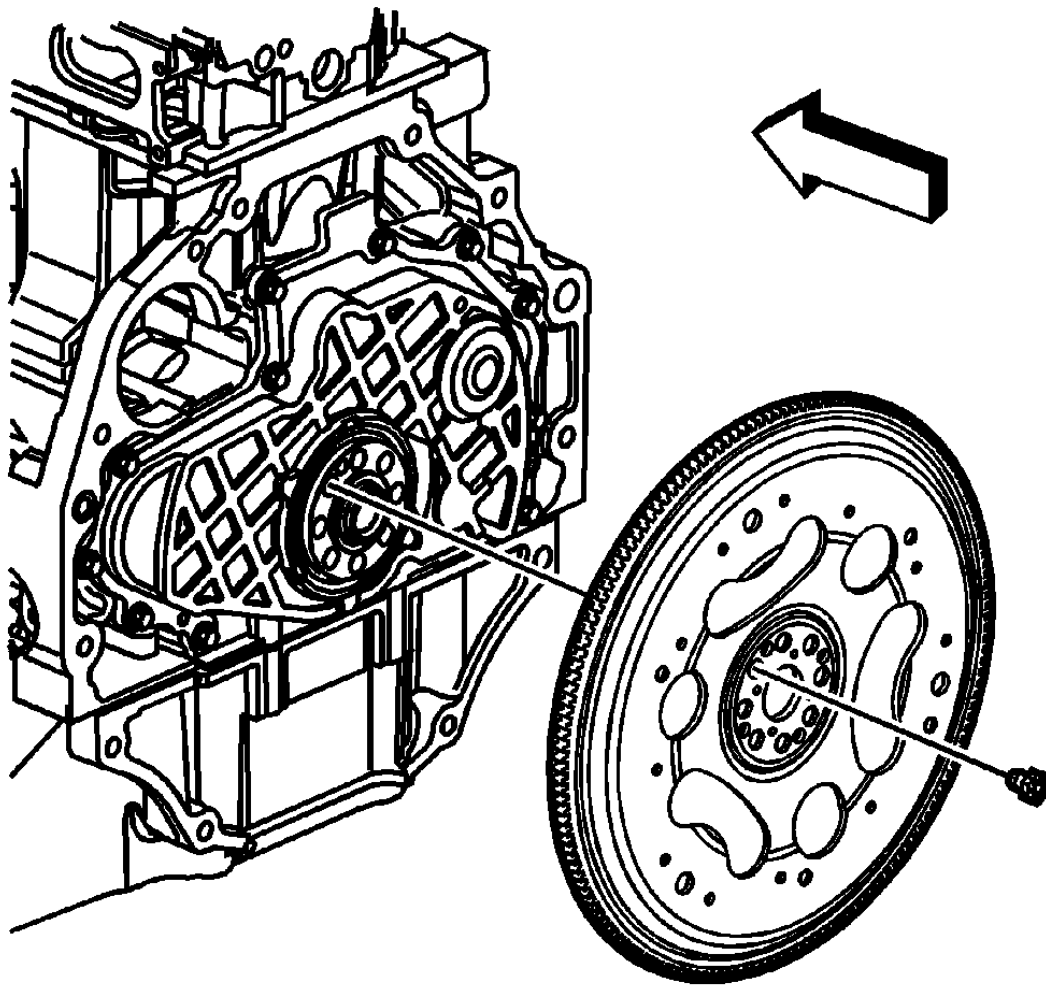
View Of Engine Flywheel (Automatic Transmission)
